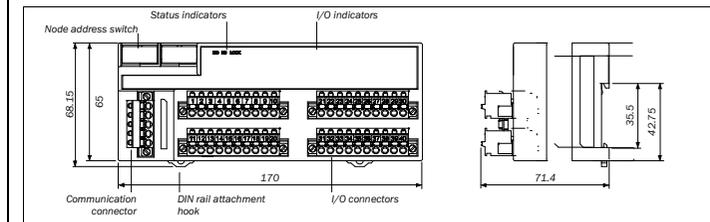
Dimensional drawing UE4421-22EE900 and UE4421-22EE490 (mm)
